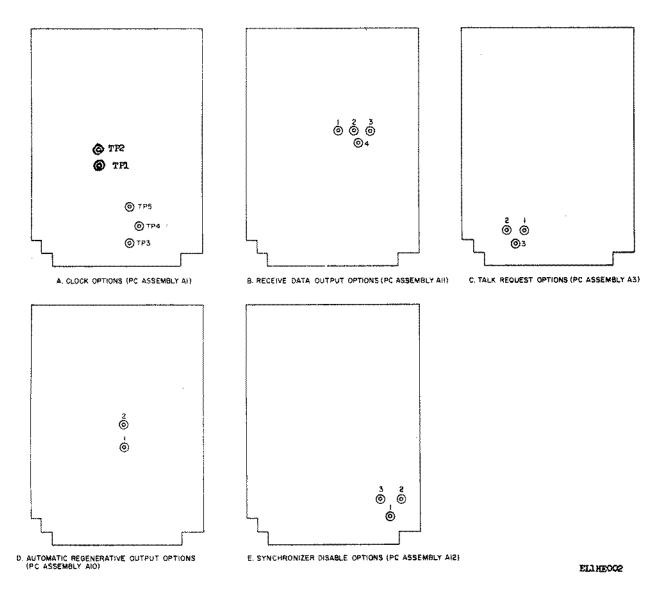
Printed-circuit card assembly strap terminal locations.
